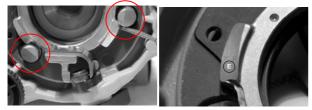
+b - Detail view (from below) of the upper tribrach plate showing the instrument released (a); Detail view of a clamping flange (b)
